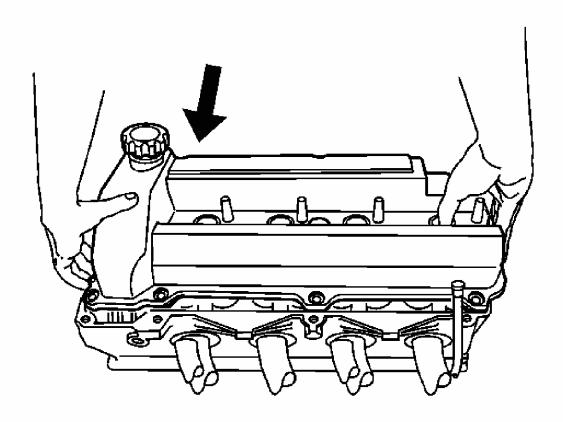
Replacing Camshaft Cover Courtesy of GENERAL MOTORS CORP.
